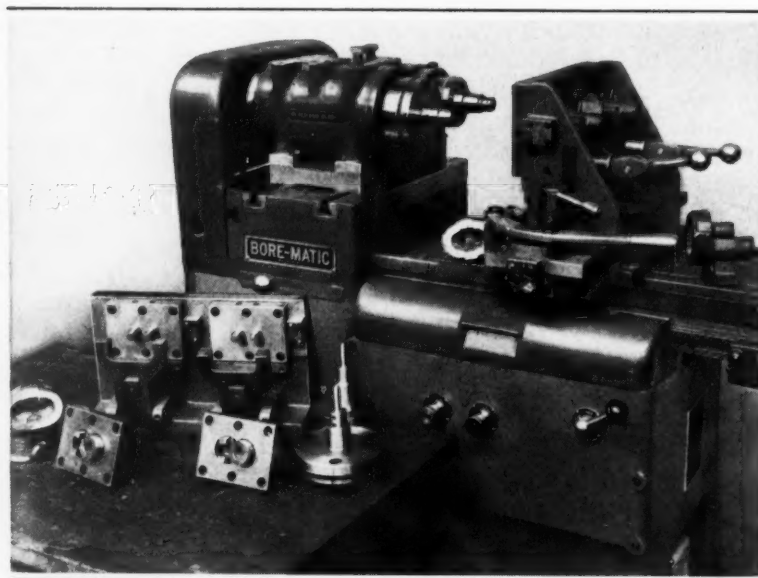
View of Bore-Matic Showing Rear of Work-holding Fixture
